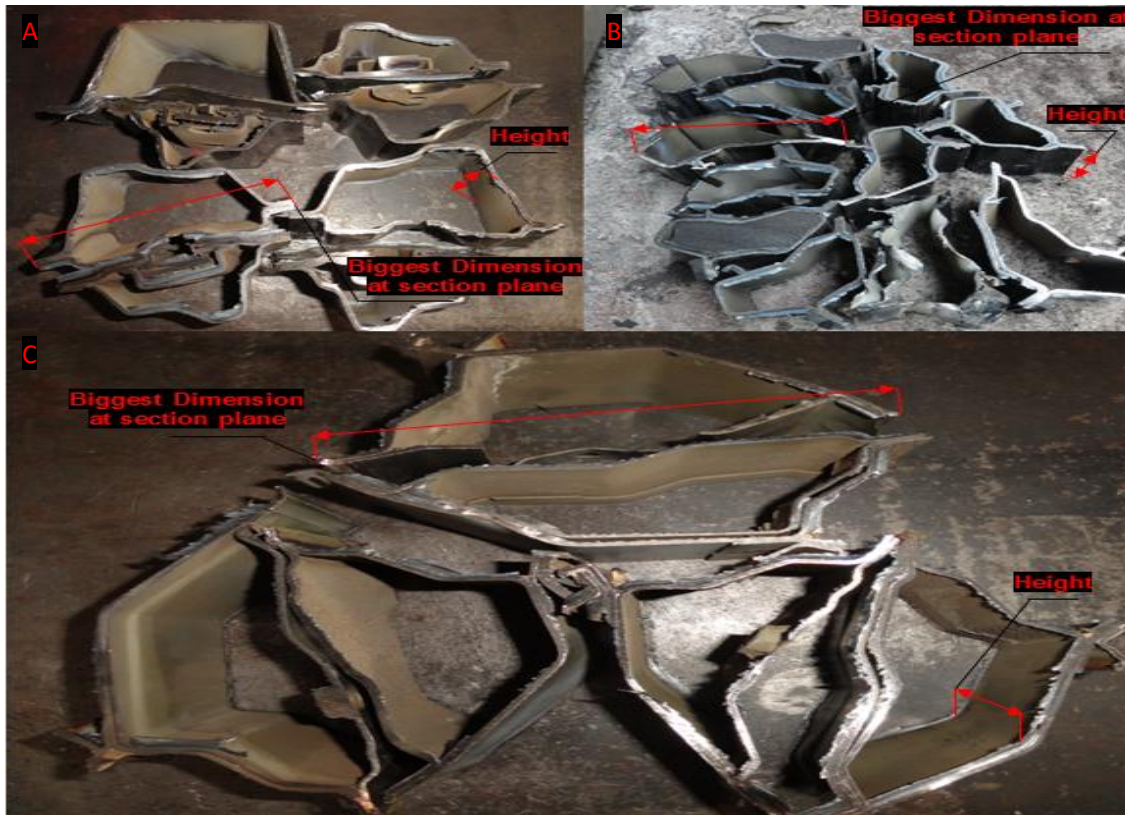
Illustration of Height and Biggest Dimension at section plane of unit cell, A (Center Pillar Section), B (Front Pillar Section), C (Roof Rail Section)
